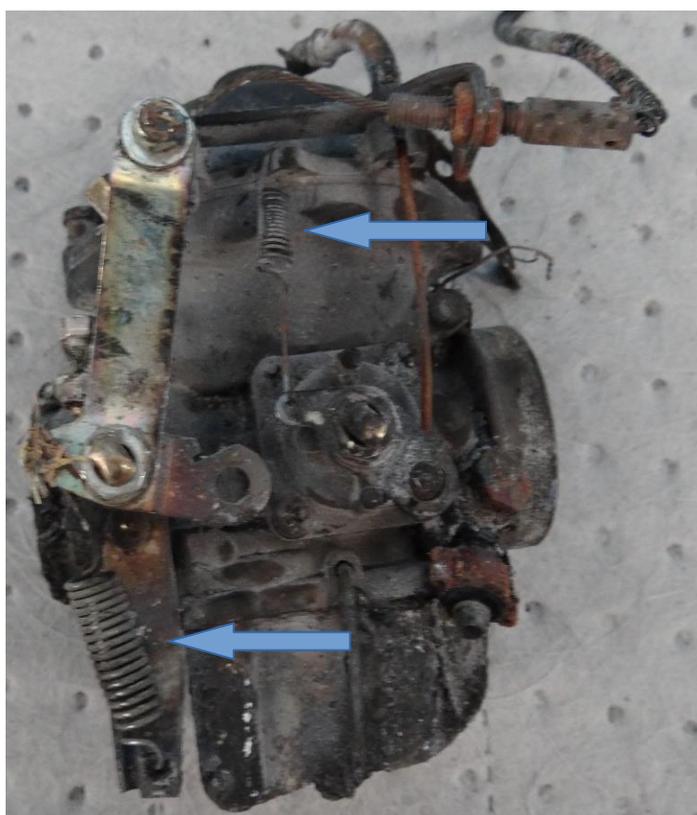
Carburetor view from the choke valve control lever side [source: PKBWL analysis].
